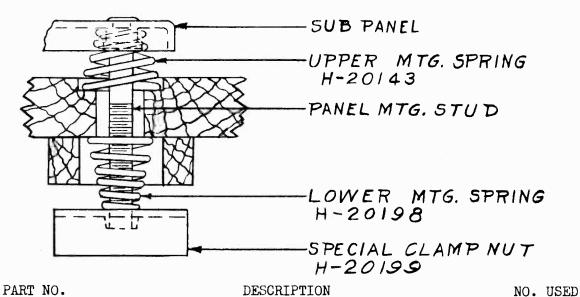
FIGURE VI - TONE ARM MOUNTING ASSEMBLY
